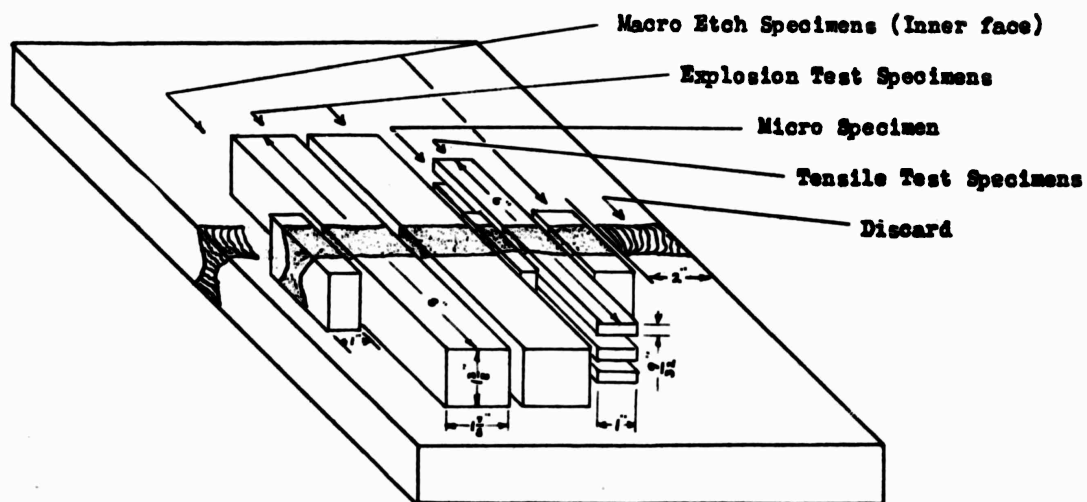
Manner of Sectioning Test Plate for Test Specimens
